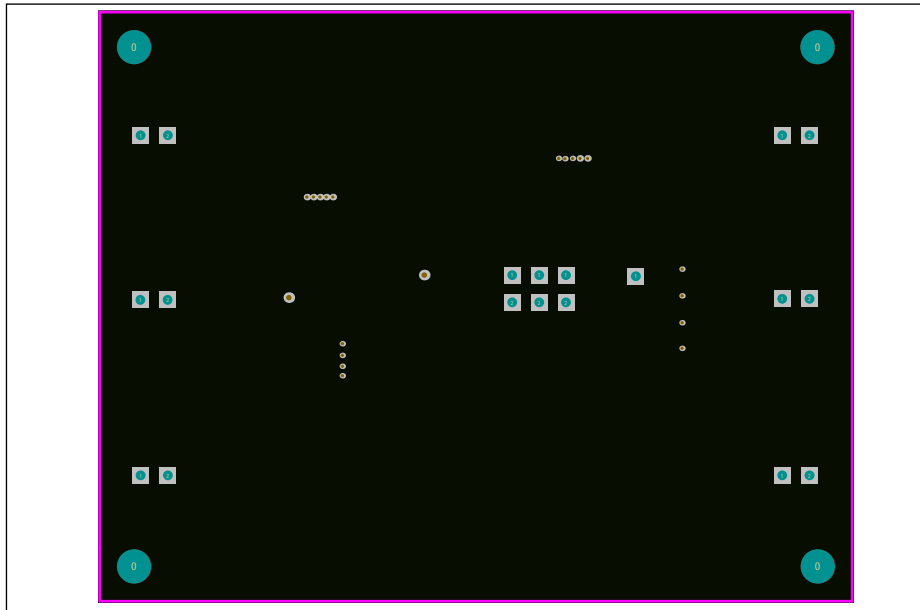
Board Component Placement Guide - Bottom Layer (SOT23-6)
